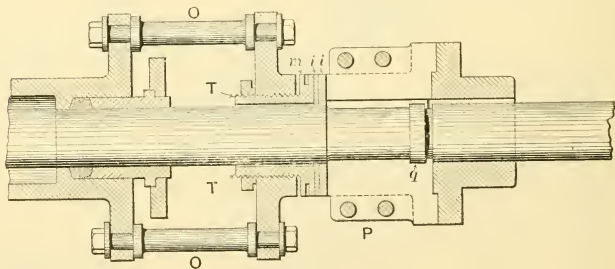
DETAIL OF THRUST BEARING OF PUMP
